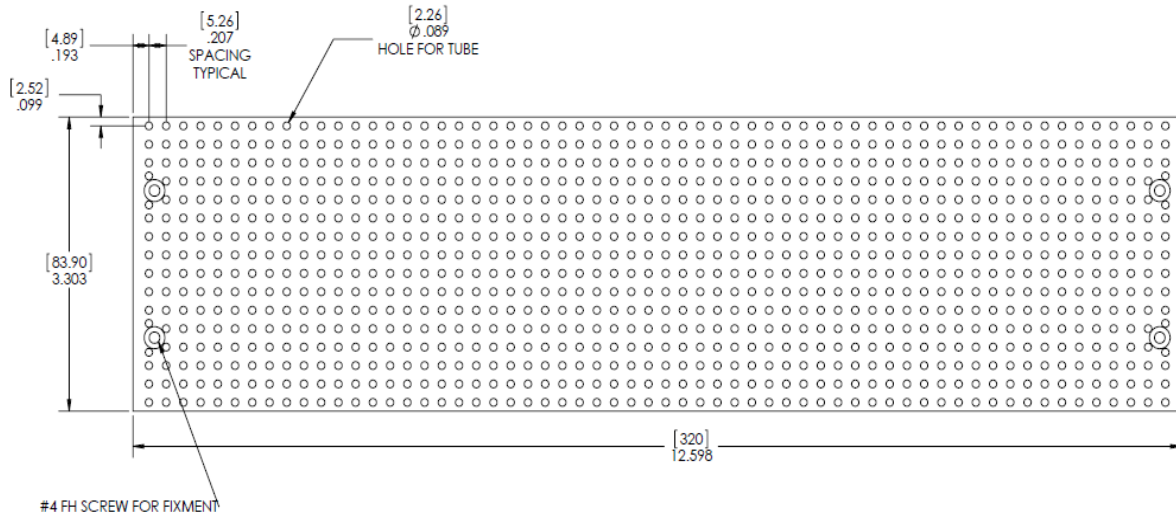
Drawing of the high resolution of pressure taps on instrumented panel used on the wind tunnel building model. Square brackets indicate mm dimensions, other dimensions are in inches.
